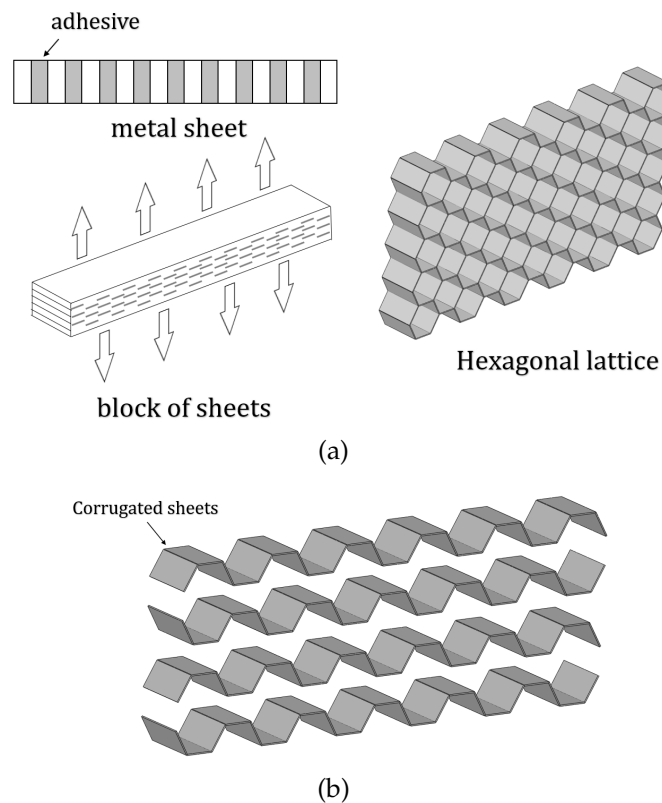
Schematic drawing of honeycomb fabrication process: (a)the expansion method, (b)the corrugation method.
